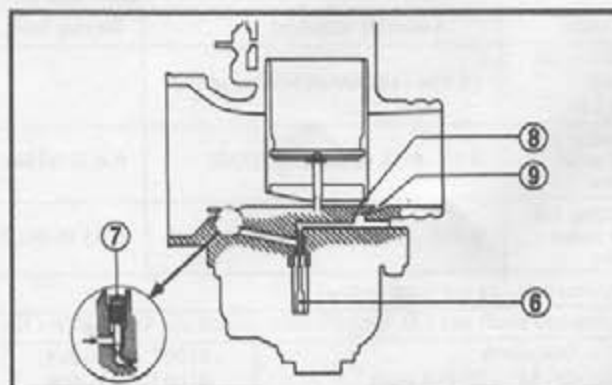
(6) Slow jet (7) Air screw (8) Bypass (9) Pilot outlet
